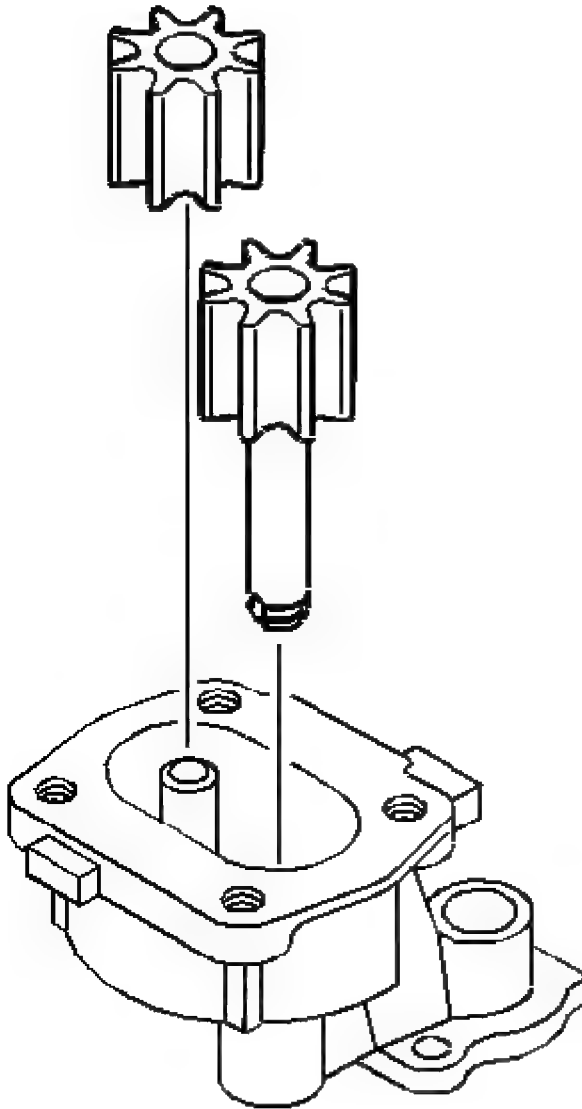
View Of Oil Pump Drive Gear & Driven Gear
